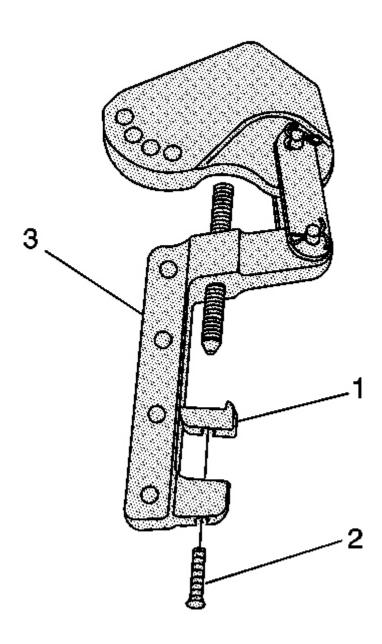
Pivot Arm Assembly Foot & Bolt Courtesy of GENERAL MOTORS CORP.
